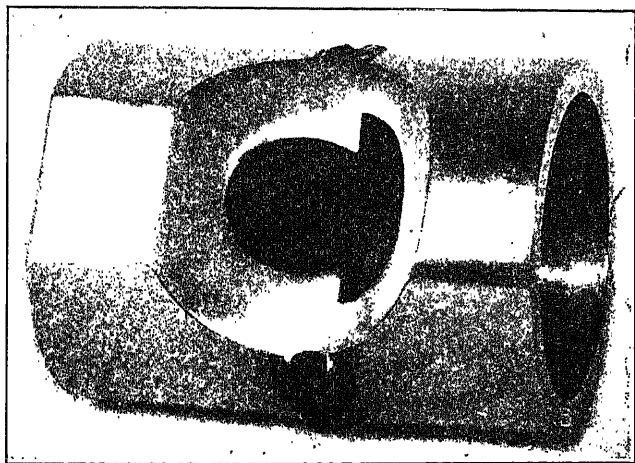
Piloted Cup Automatically Welded by Metallic-Electrode Arc Process to Tube to Form 75-MM. Shrapnel Shell.
